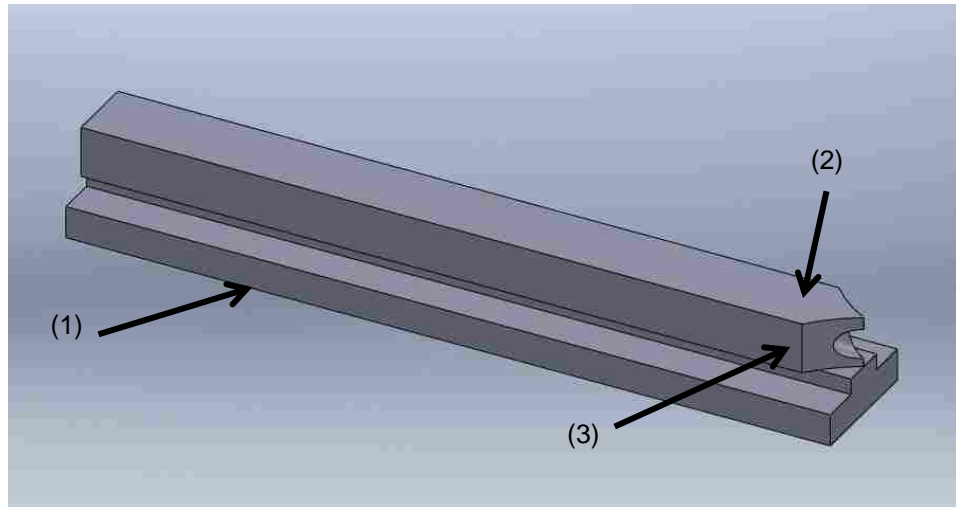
Isometric View of the Wire Guide. (1) the flanges that allows the wire guide to fit inside the milled key slot in the body of the wire feeder. (2) the radius of curvature of the bevel matches that of the feeder wheels allowing the wire guide to nearly butt up against them. (3) the channel which the wire passes through before being fed into the wheels.
